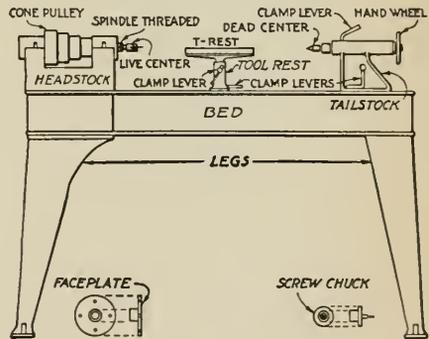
A typical wood turning lathe. All lathes have substantially the same parts.
